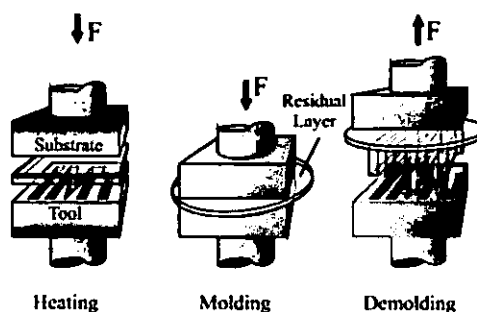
The hot embossing process: Heating, molding, and demolding are the characteristic process steps. The hot embossing process is characterized by a residual layer which allows for an easy handling of the molded part.
